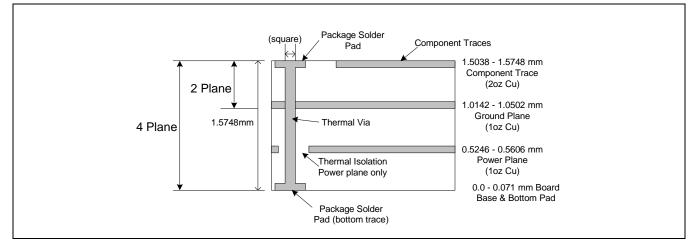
JEDEC Standard FR4 Multi-Layer Board – Cross-Sectional View
